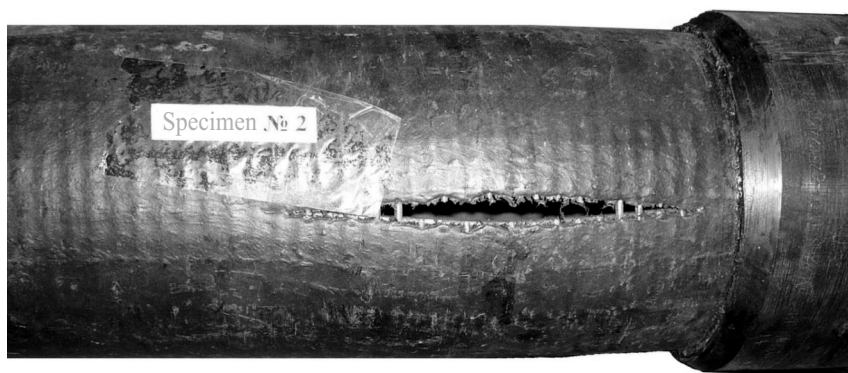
Specimen of a reinforced pipe after short-time tests under internal pressure.
